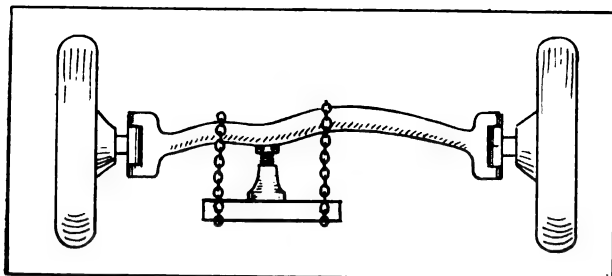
Method of Straightening a Bent Axle with a Screw Jack Without Heating.
